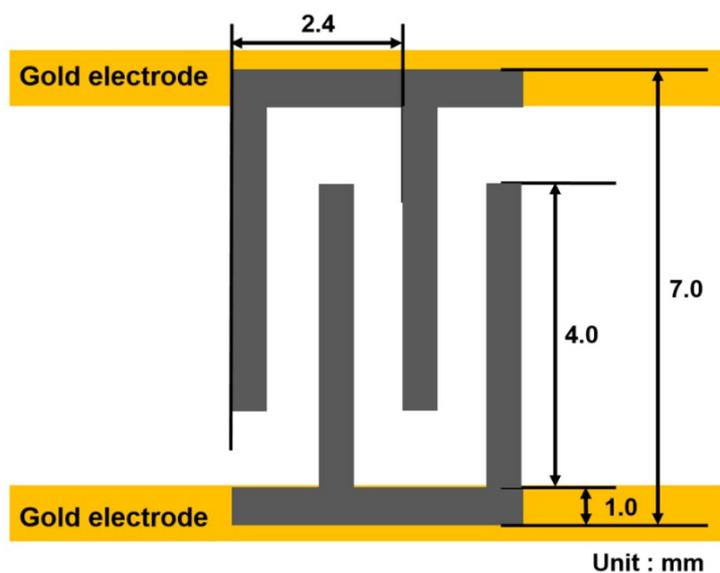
Dimensional drawing of a single layer of the printed 3D structure (top-view).
